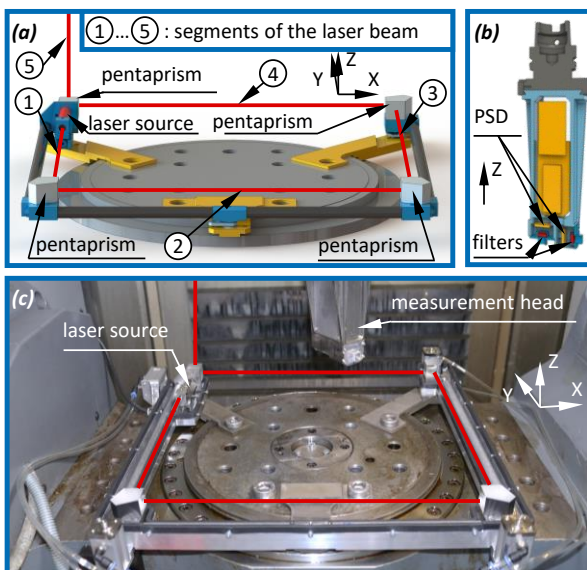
Laser beam and frame (a), measurement head (b), measurement setup including housing parts in a machine (c). [Brecher 2021]
